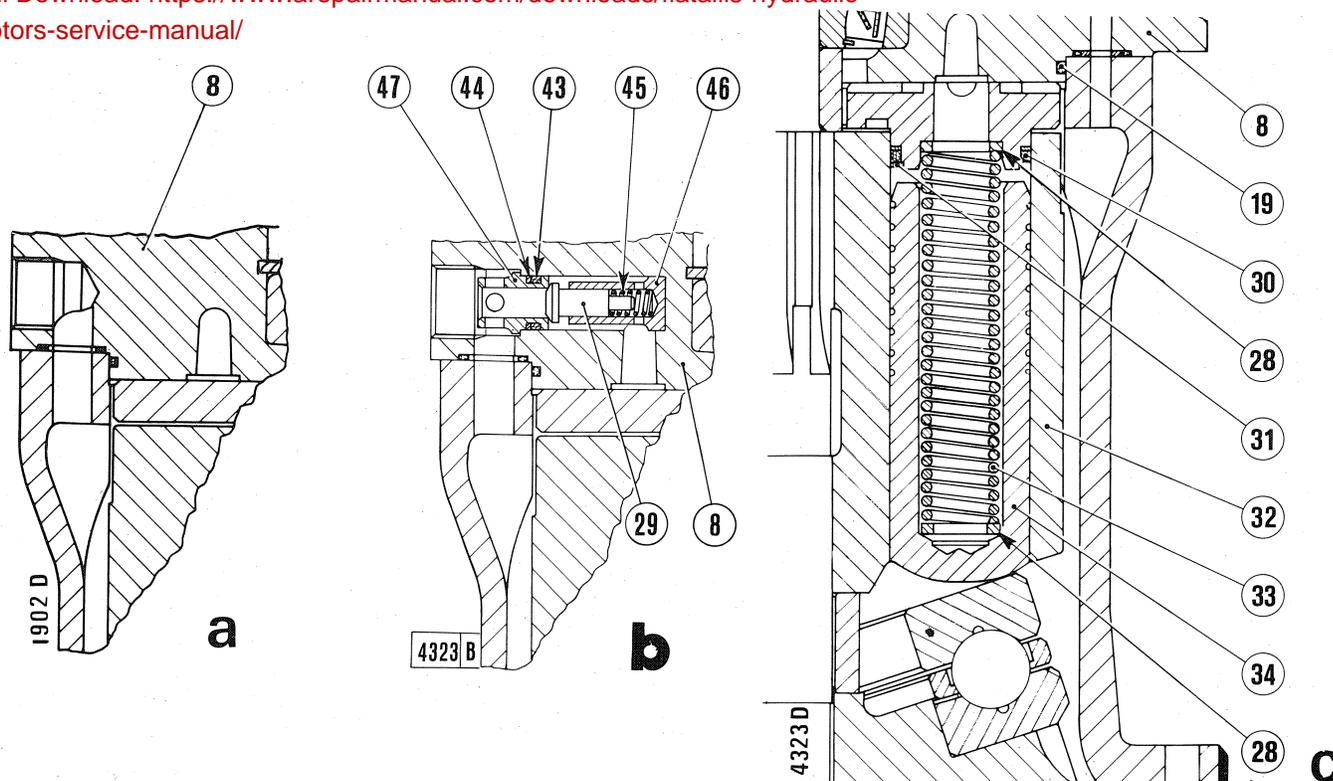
Section through hydraulic motor (MI2F or MI4F) with piston (34) (pre-mod configuration).
